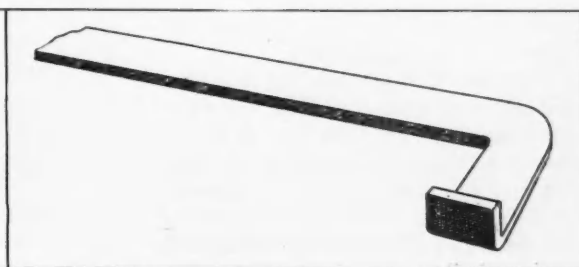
Sheet metal lining and covering can be removed with ease by this tool, made right and left from bar stock
